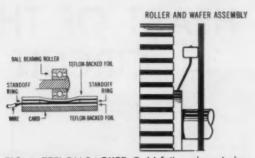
TEFLON-BACKED Gold foils make noiseless contact in new commutator switch. Cross section (left) shows foil diaphragm depressed by bearing. Right-hand view shows drive gear and roller assembly.
